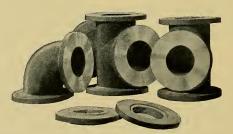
Flanged Pipe Fittings. Made principally of semi-steel or cast iron
